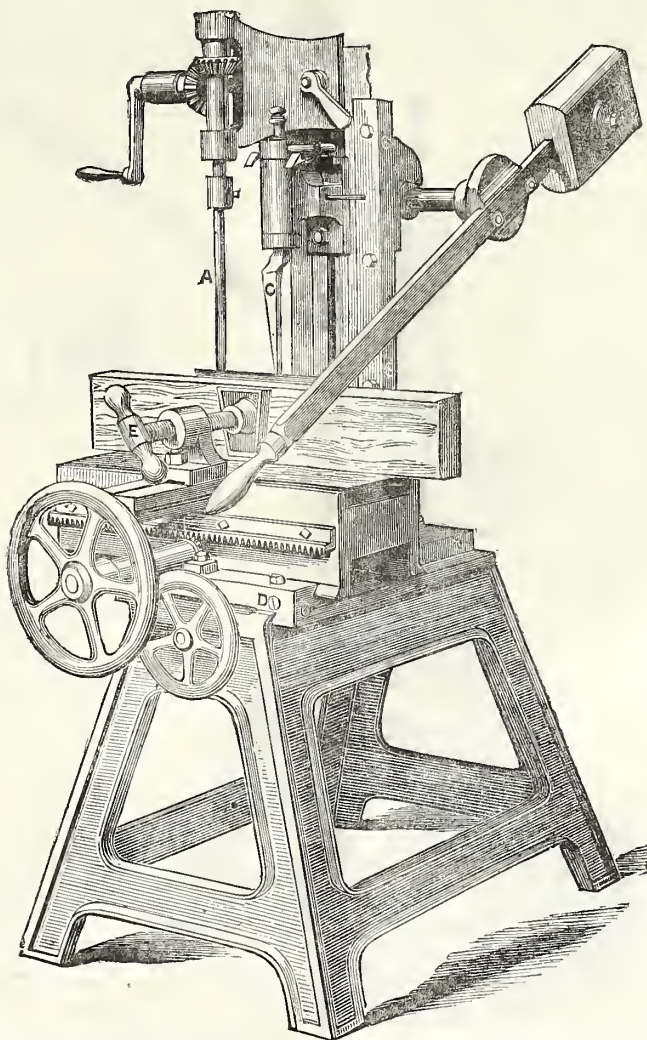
REYNOLDS AND Co.'s IMPERIAL MORTISING AND BORING MACHINE.
